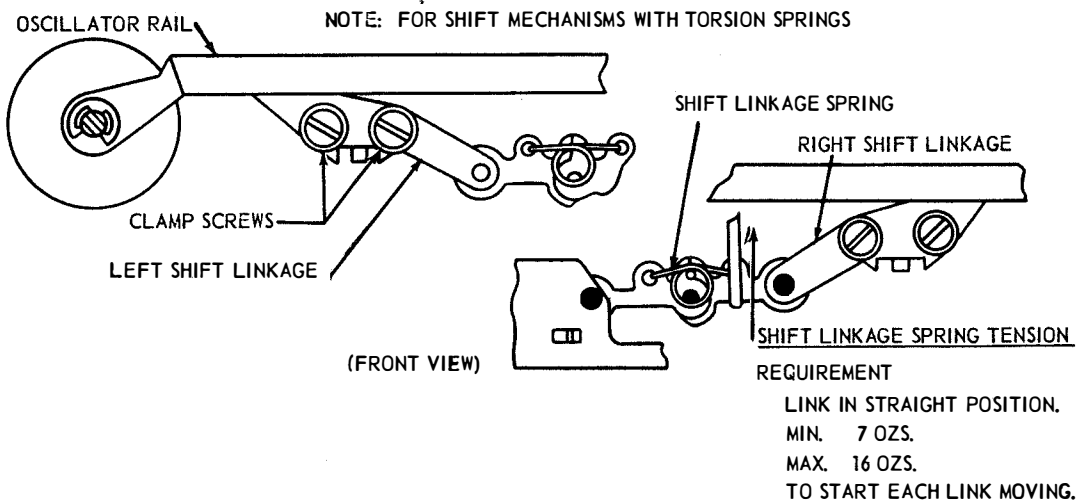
TYPING UNIT, SHIFT MECHANISM
